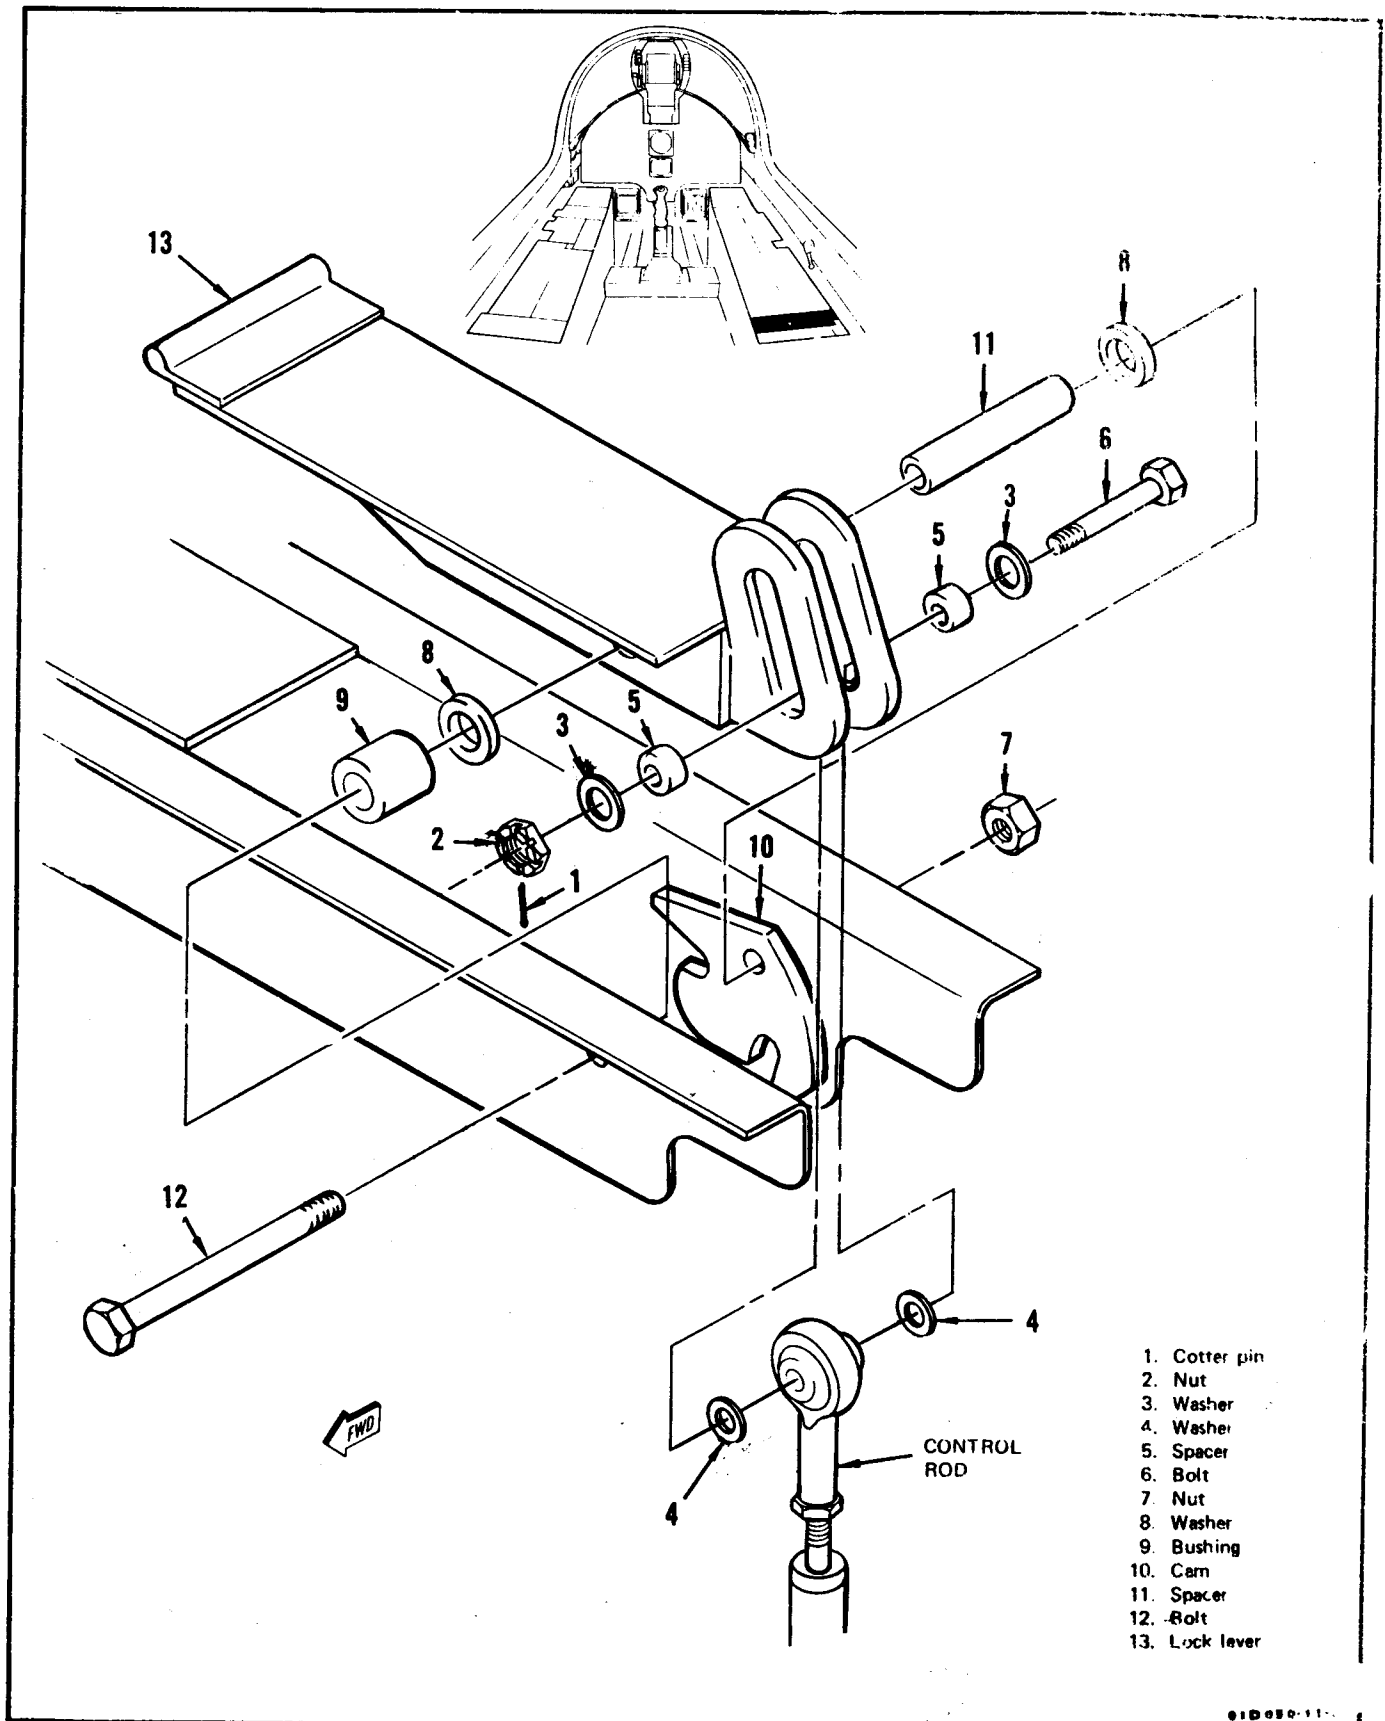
Wing Hinge Pin Lock Lever Removal and Installation
